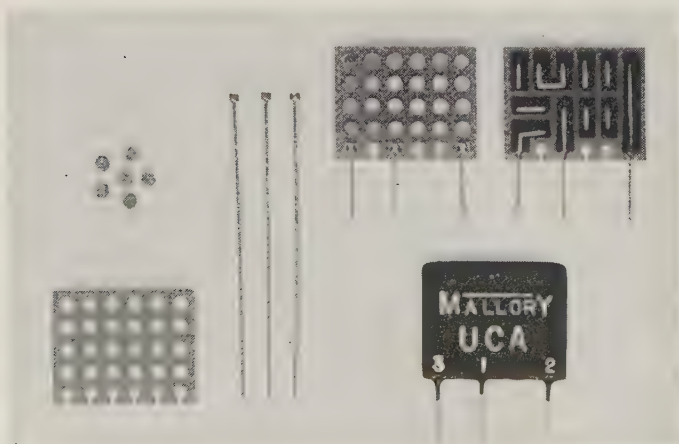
"Dot" type unitized component assembly—demonstration sample (Mallory).
